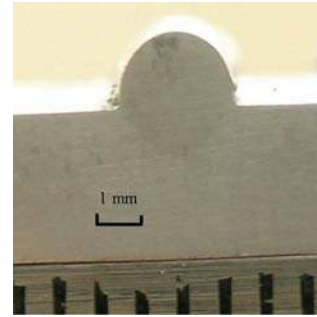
, Weld bead and cross section view of DB-GMAW (Bypass current L&R : 50A-50A)
